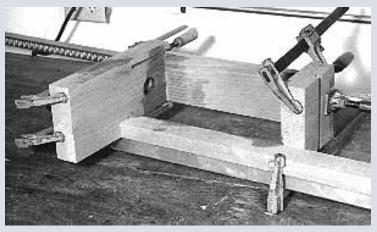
Glue together the moving jaw, rear jaw, guide bar and front plate of the tail vise. Ensure that the four pieces are square to each other.
